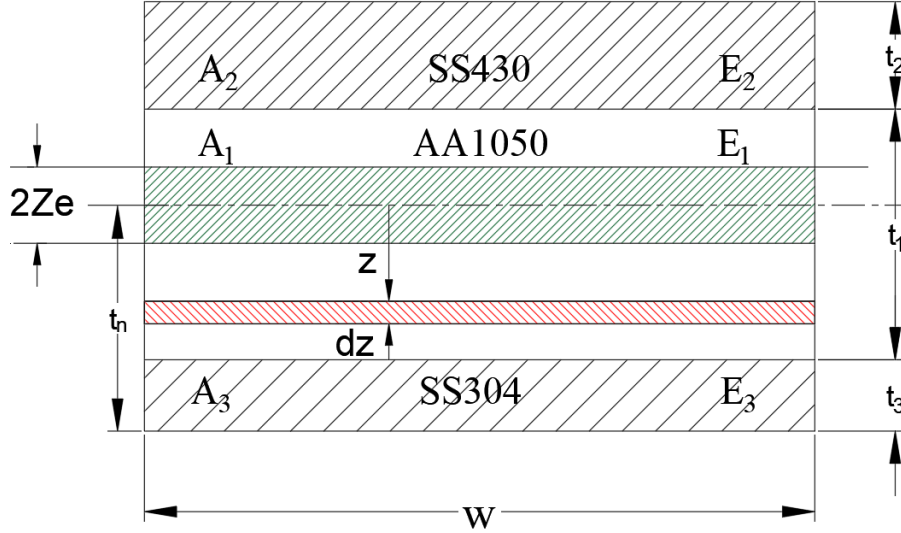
Cross-section of a three-ply clad sheet with a SS304 as the inner layer during bending
